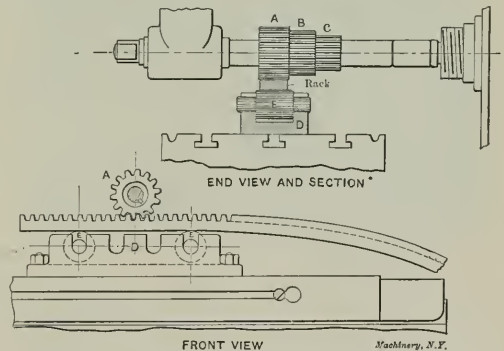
Straightening Cold-rolled Racks in the Milling Machine.
